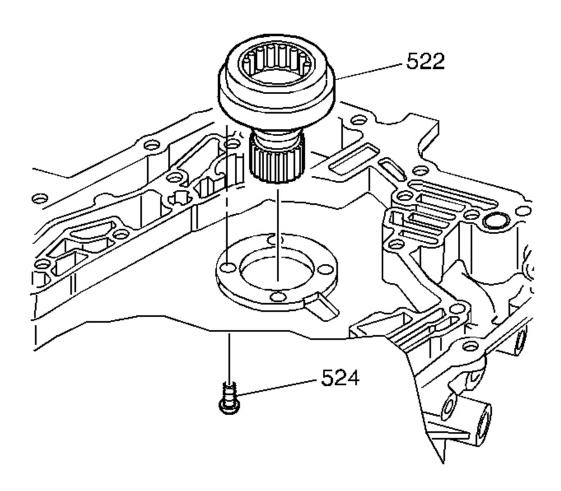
Locating Drive Sprocket Support Assembly Courtesy of GENERAL MOTORS CORP.
